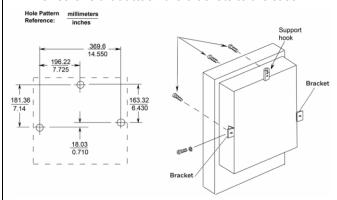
Surface Mounting on a Panel or Wall (Rear View)
